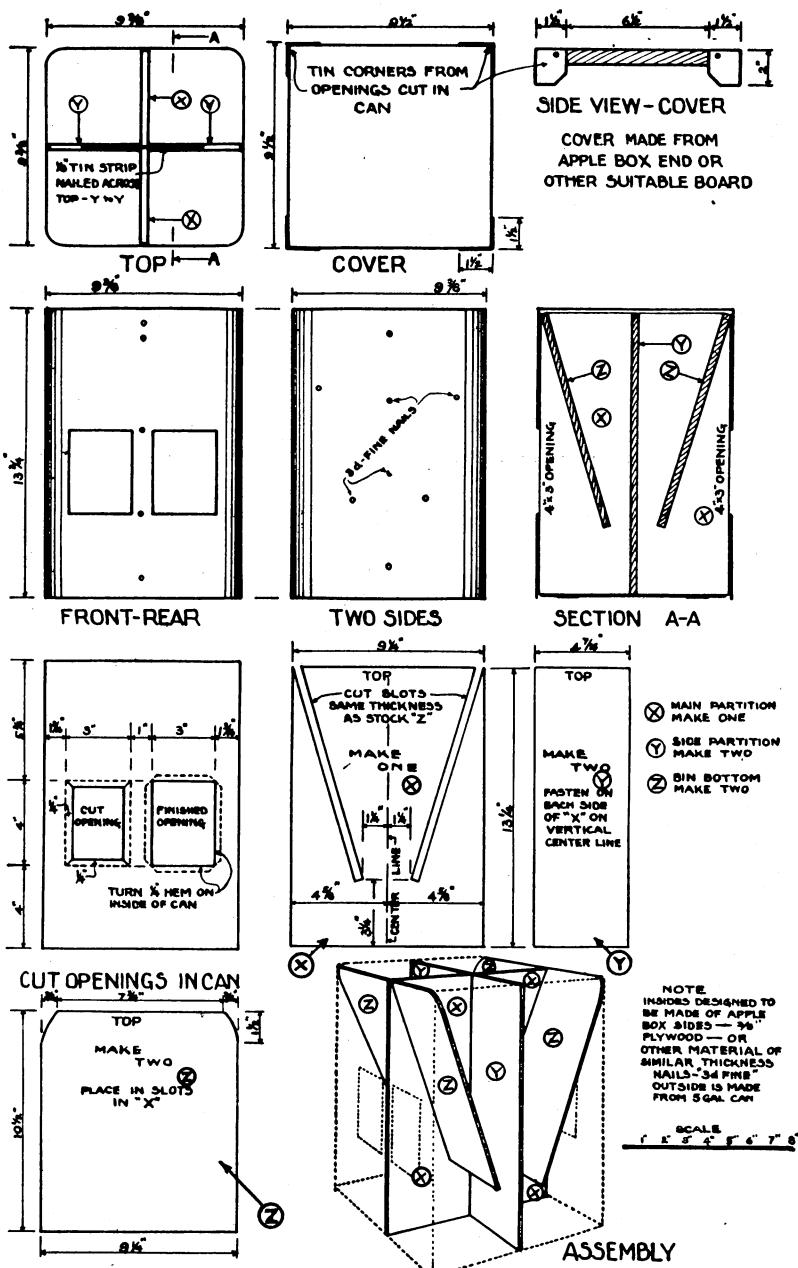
Self-feeder shown in figure 25 made with wood instead of galvanized iron.
